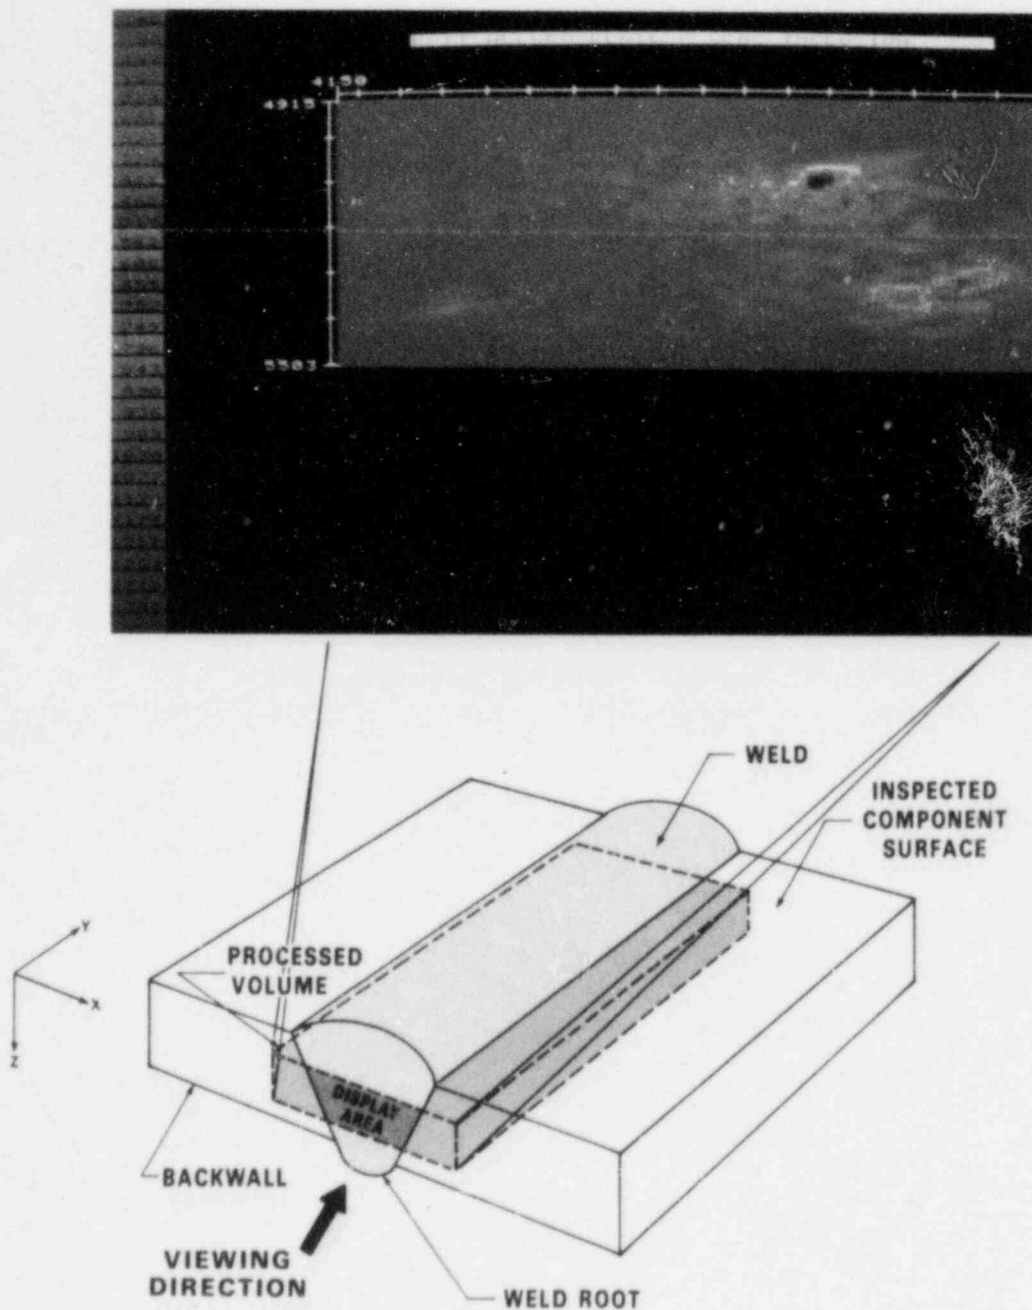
BUTT-WELDED CARBON STEEL PLATE SPECIMEN - SLAG INCLUSION SECTION
